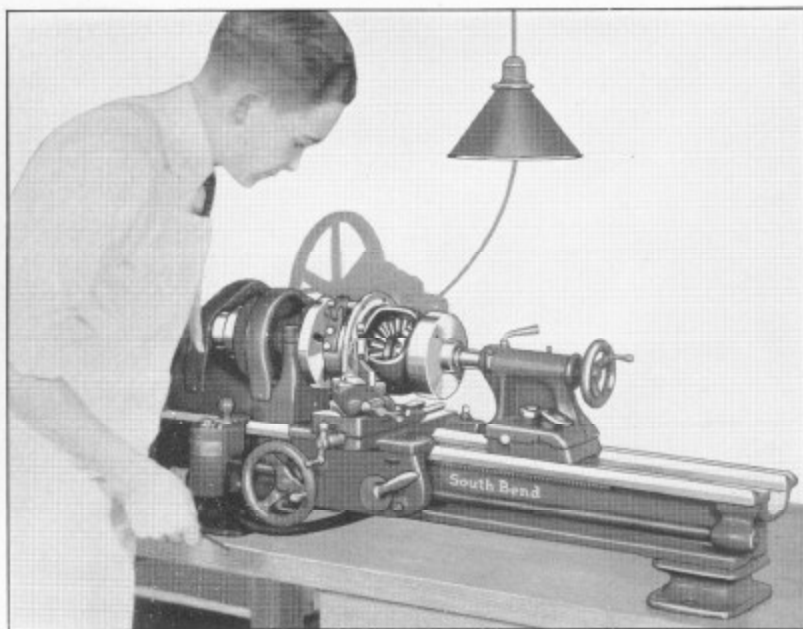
Truing a differential gear case flange in a 9-inch South Bend Workshop Lathe.
